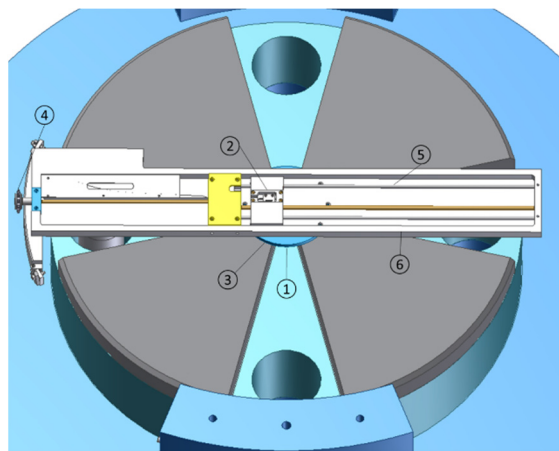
3D drawing of magnetic field measurement system for AMS cyclotron.
